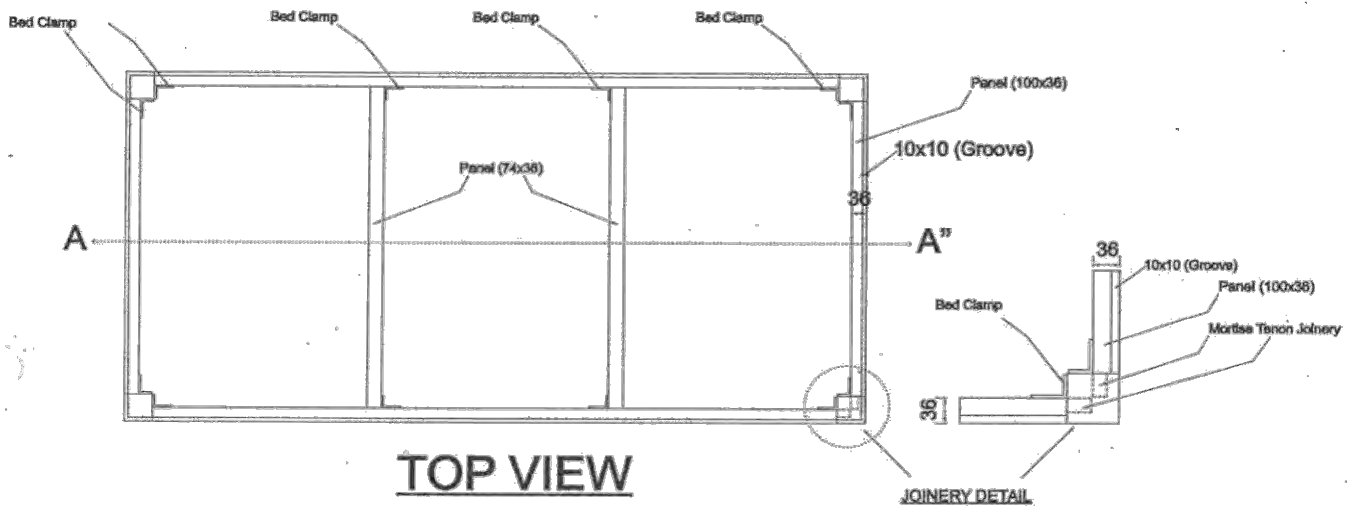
DETAILS OF JOINERY, SCREW HOLES FOR ASSEMBLY & DIMENSIONS
